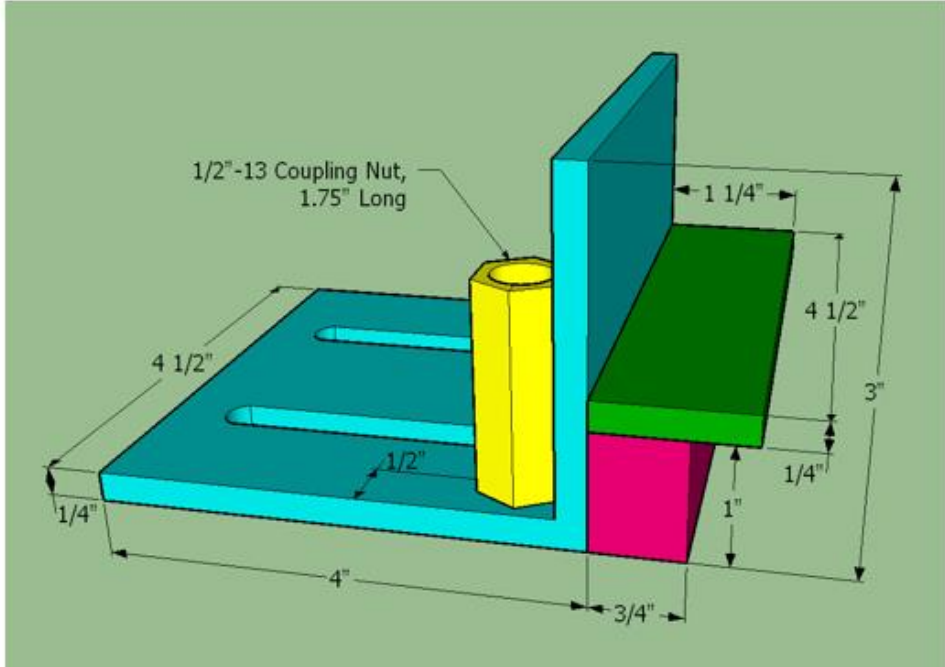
Flanges (F2& F3)- Sample Holder of Rectangular Specimens.
